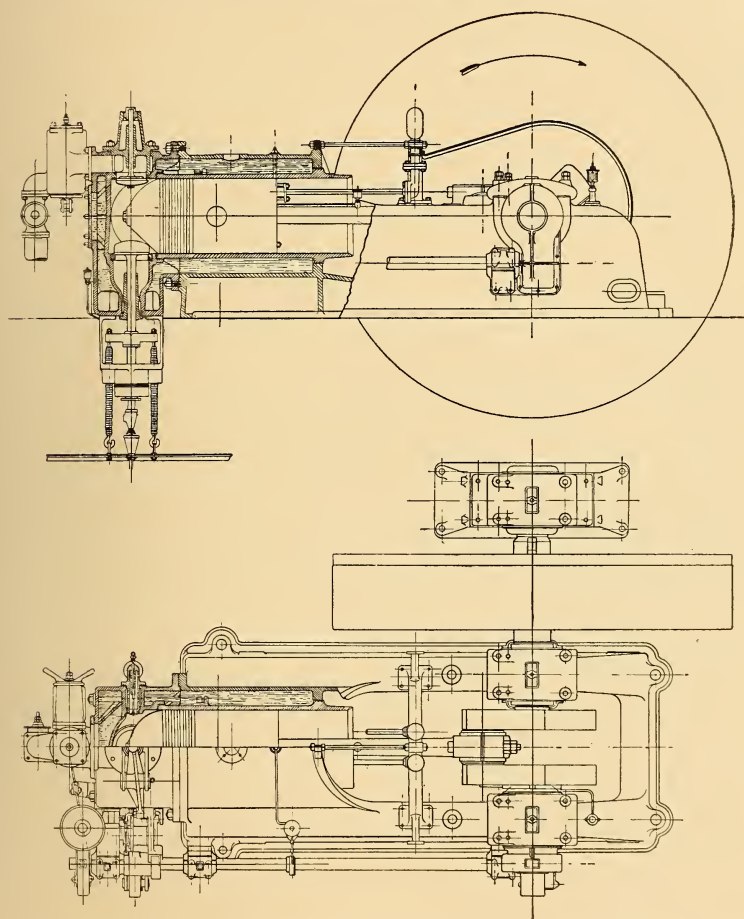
Standard Arrangement of Campbell Gas Engine. Note the disposition of the inlet and exhaust valves, and the water cooling arrangements. On the plan at the lower side is seen the half-time-shaft.
